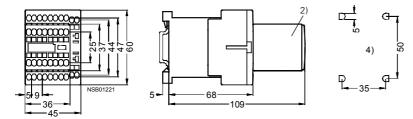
3RT10 1 contactors (Cage Clamp-connection) with auxiliary contact block
